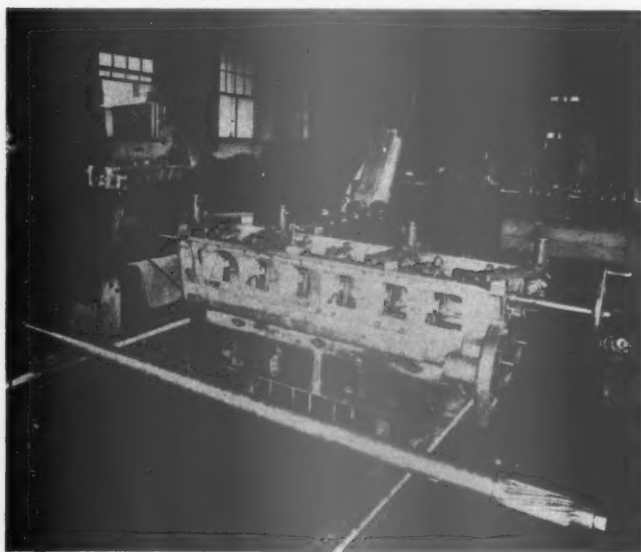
Engine set up for boring the crank-shaft bearing seats
